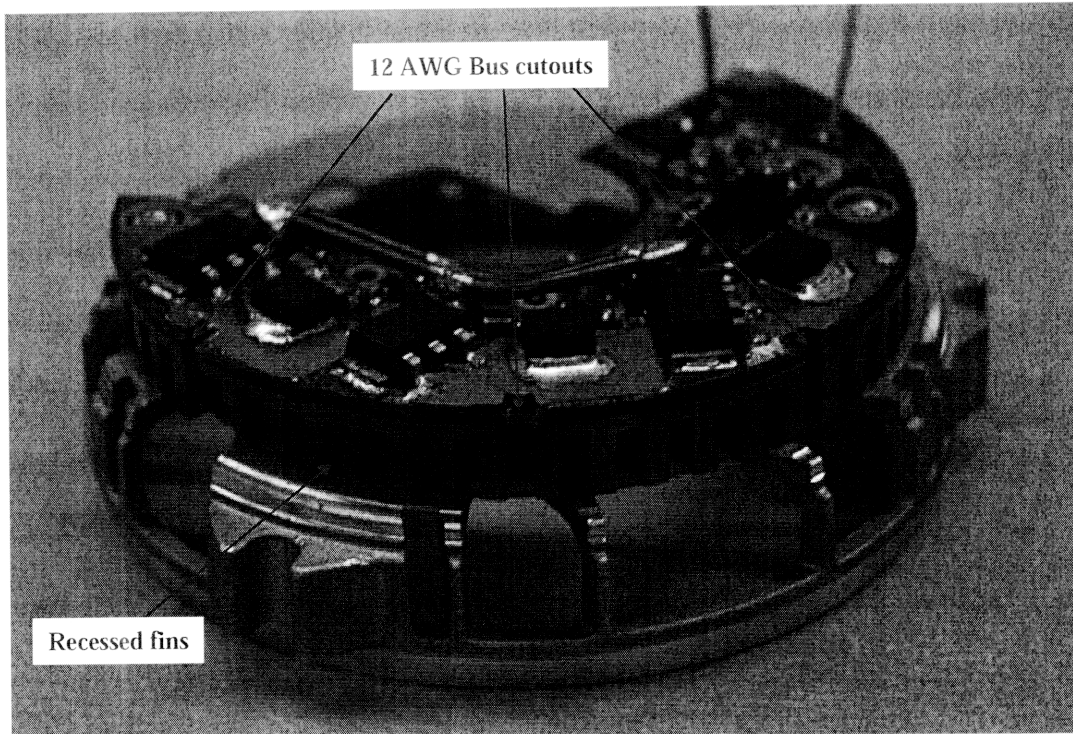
PCB and Heatsink mounted to housing with labeled ground conductor interfaces
